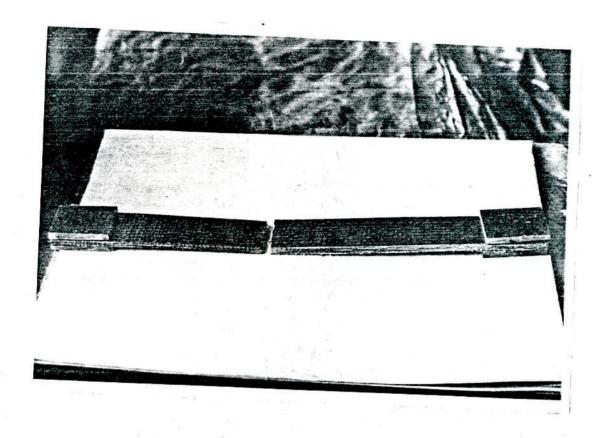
Photograph of fractured tensile test specimen of reinforced plastics.
